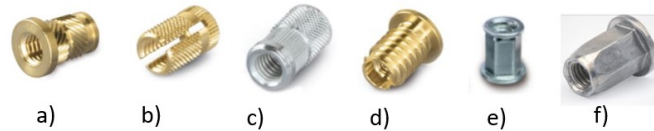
Commercial inserts types ultrasonic(a), expansion(b),press in(c), self tapping(d), molded in(e), and rivet nut inserts(f)- Image courtesy Bollhoff.
